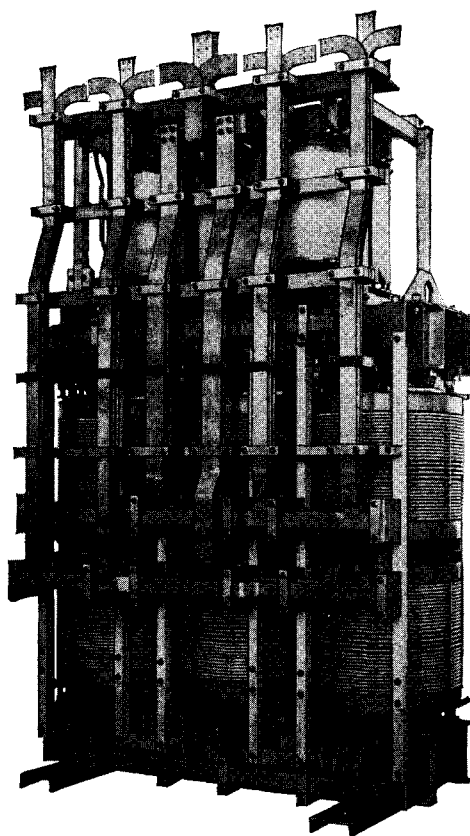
CORE AND COILS FOR 12 PHASE, 6000 Kw. 600 VOLT RECTIFIER TRANSFORMER WITH INTERPHASE TRANSFORMERS MOUNTED ON UPPER END FRAME
